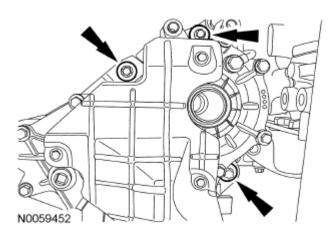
Locating LH Lower PTU Bolt Courtesy of FORD MOTOR CO.
